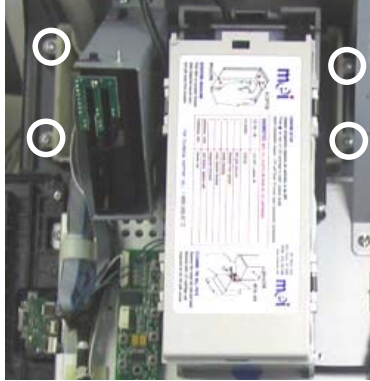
LOCATION OF 4 SCREWS SECURING COIN & BILL ACCEPTOR BRACKET
